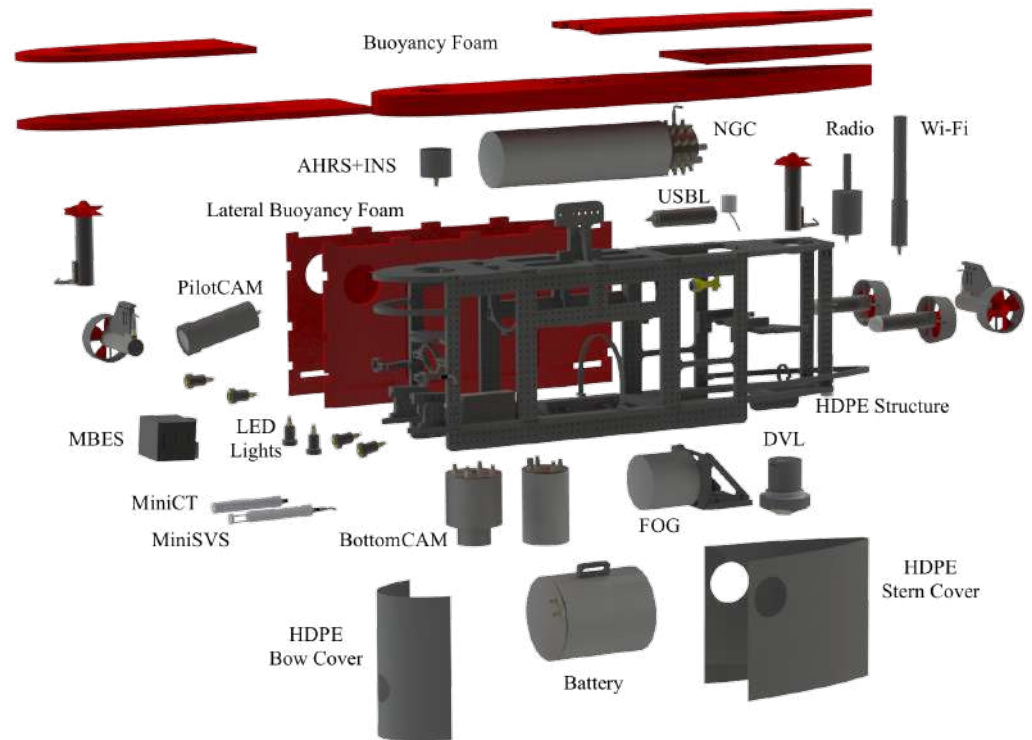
Exploded view technical drawing of Blucy UUV structure and hardware subsystems.
